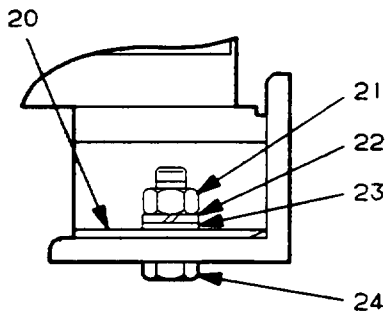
SHELTER ASSEMBLY (SHEET 1 OF 24)
